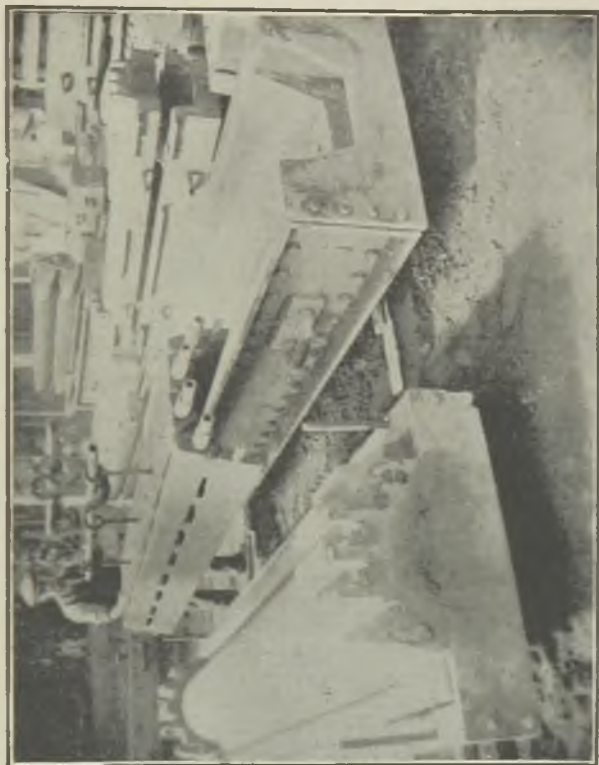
MOULD AND CORE FOR AN 18 IN. \times 120 IN. IRONER BED.
